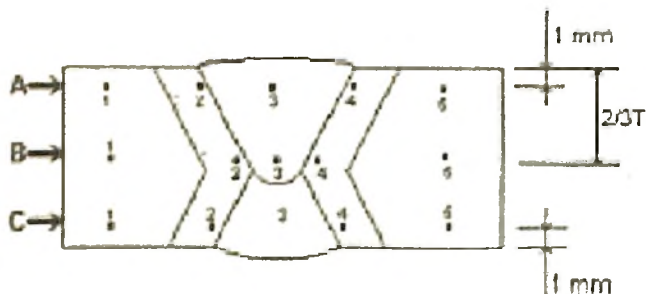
Joint design of a penstock pipe welded using cored wire
